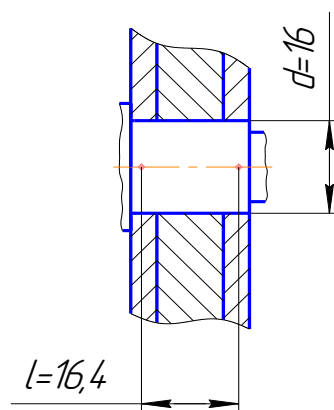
Cross-section of the axle of fastening of the longitudinal beams and eyelets.
